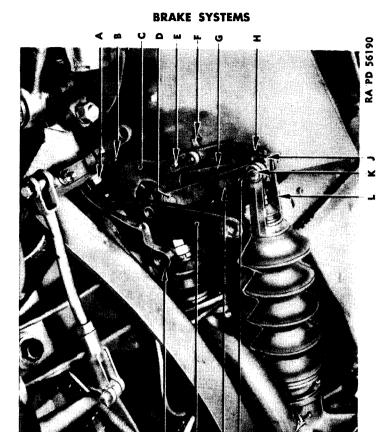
Brake Pedal Linkage -- Partially Disassembled
